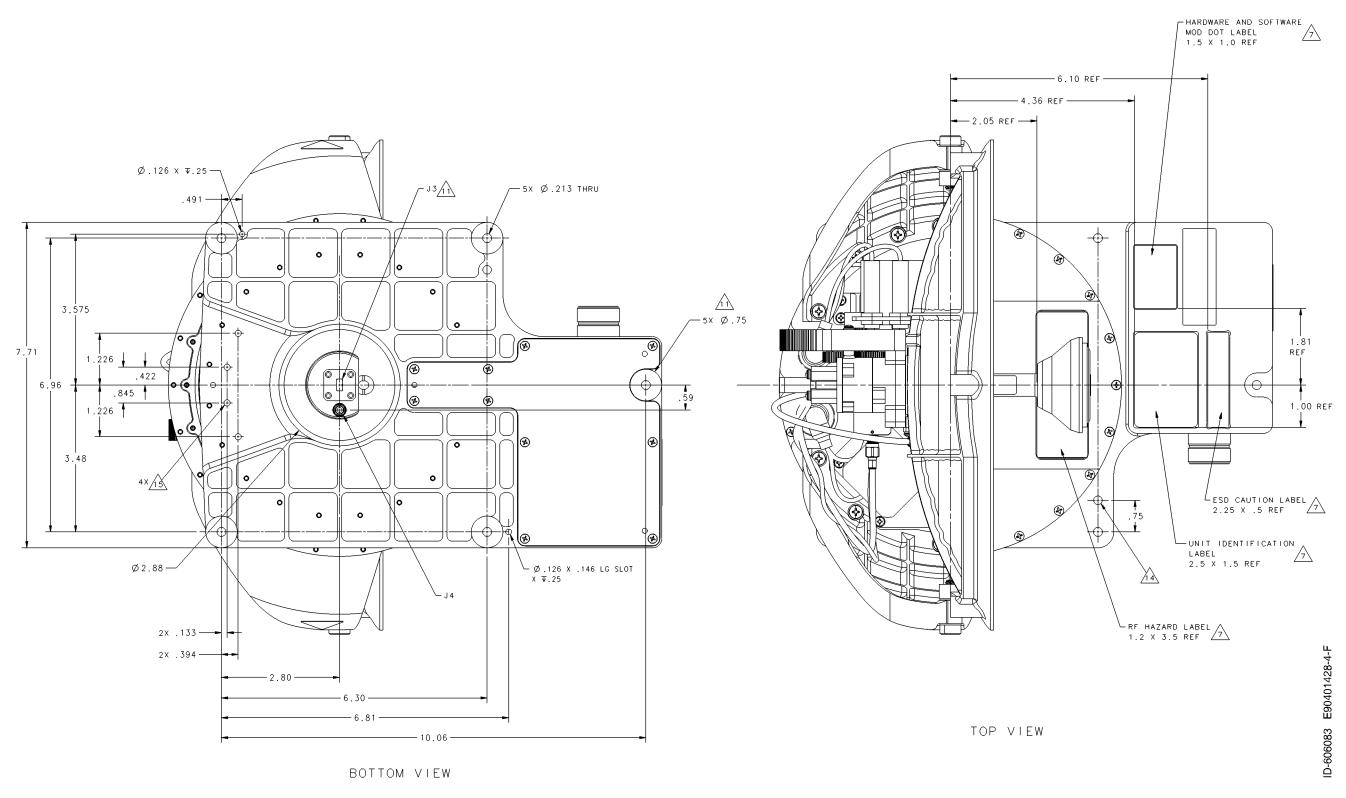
(Sheet 4 of 4) TMA Outline and Installation Drawing (90401428, REV F)
